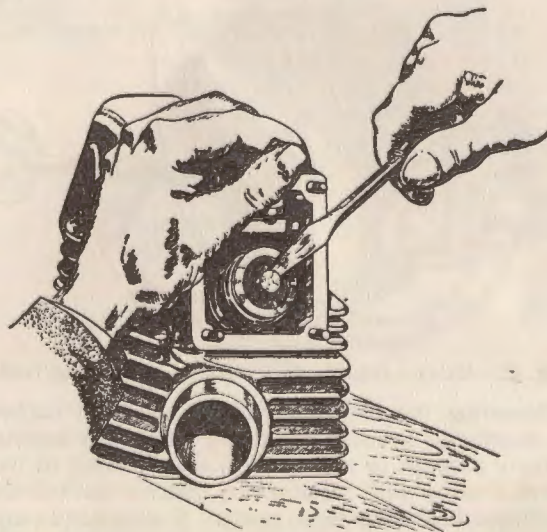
Removing Steel Thimbles or End Caps (on early models) when removing valves.
